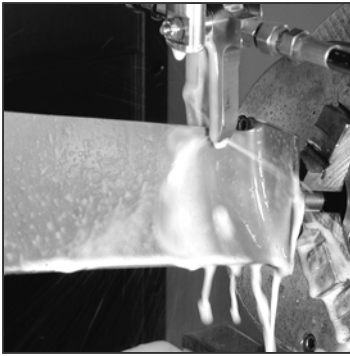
F402 LPC1 vane being processed by LPB caliper tool.
